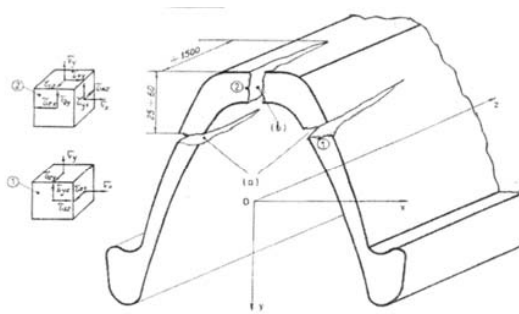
The appearance of type “a” and “b” cracks recorded at the ends of the profile during cold bending
